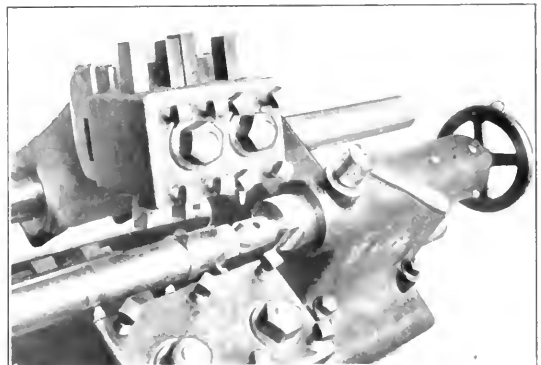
Tools illustrated in Detail in Figs. 3 and 5 set up on Fay Automatic Lathe
